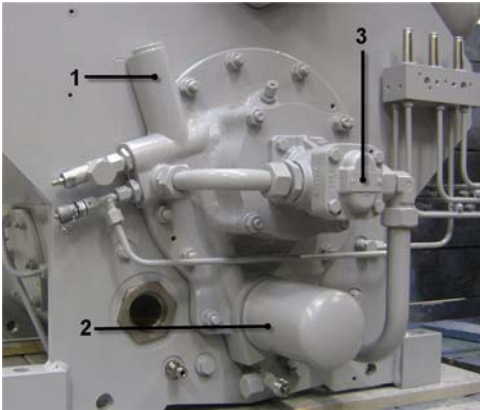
Oil control pressure regulator (1), oil discharge filter(2), oil pump (3)
